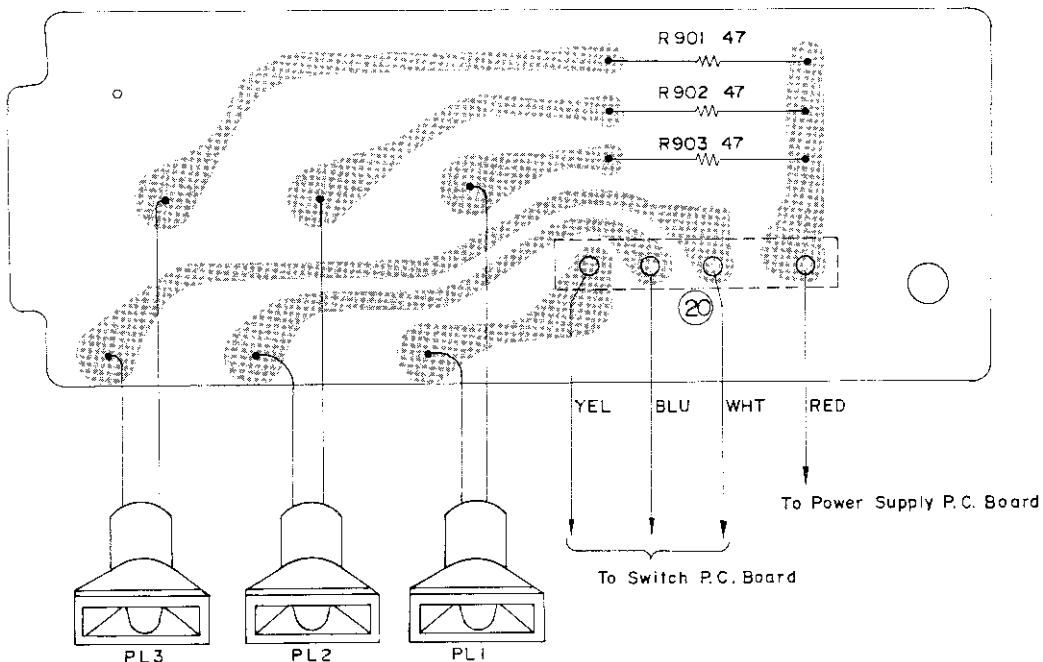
Bottom View of Lamp P.C. Board, PC-010
